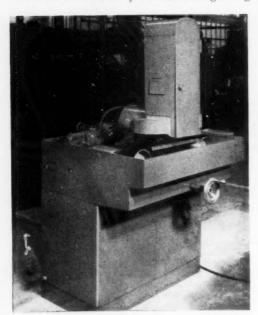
Churchill-Curtis Type 304C conveyortype abrasive-belt grinding machine
